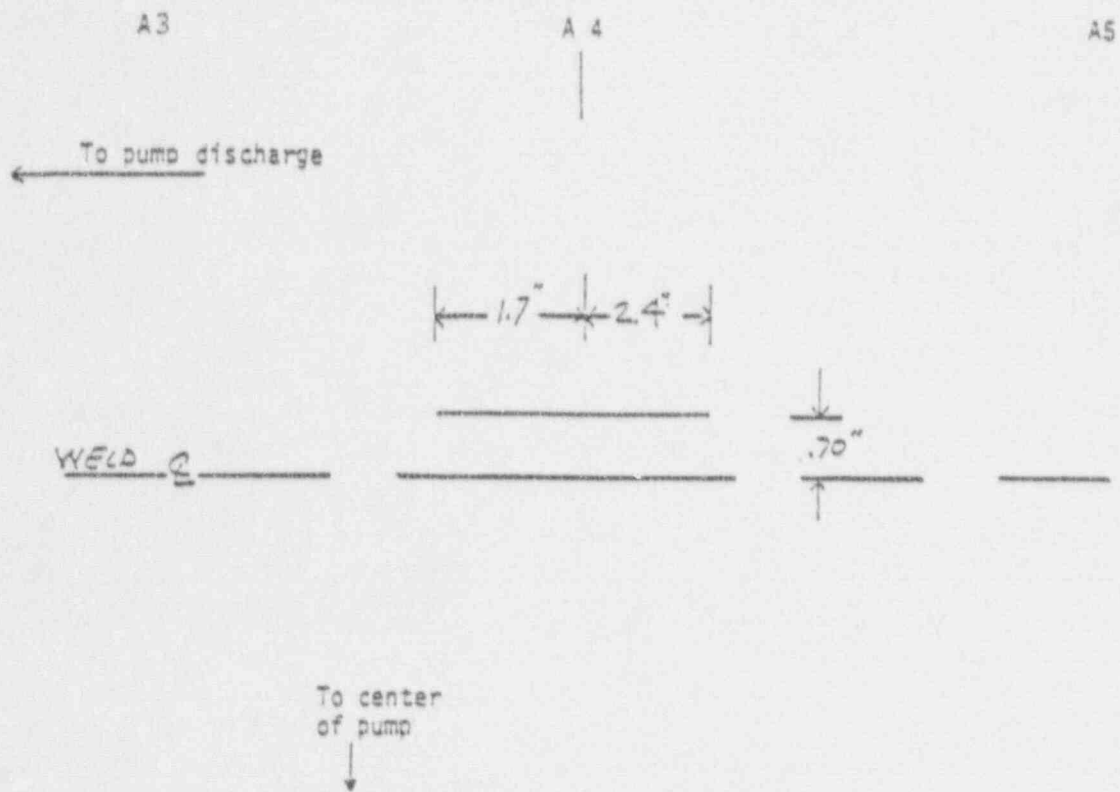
ANO-1 1988 UT Exam of "B" RCP Lower Scroll Weld Indication - Plan View
